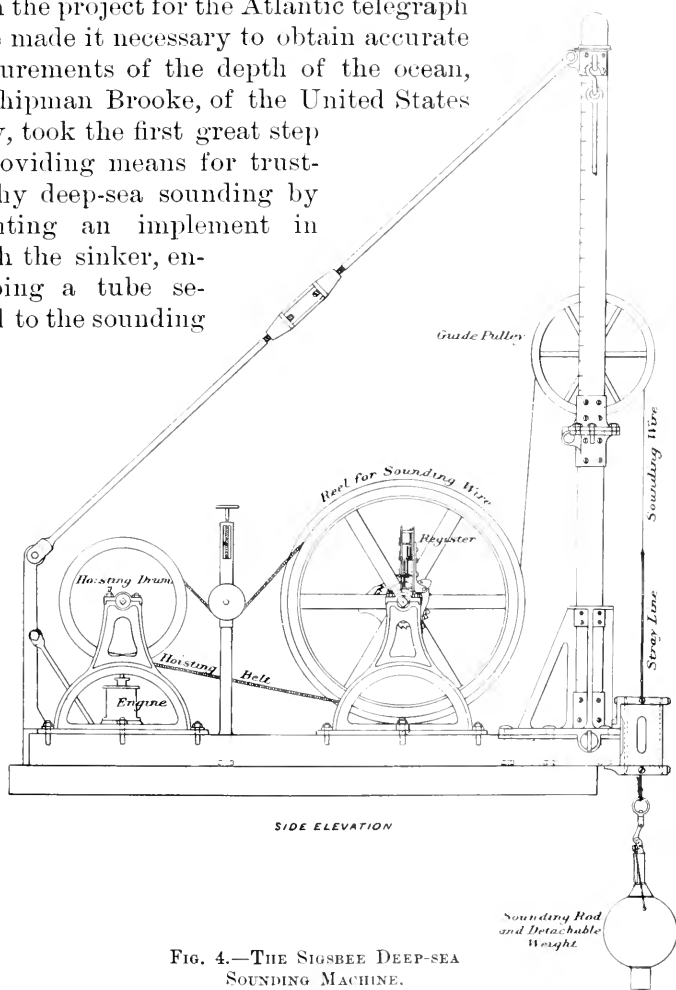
THE SIGSBEE DEEP-SEA SOUNDING MACHINE.
